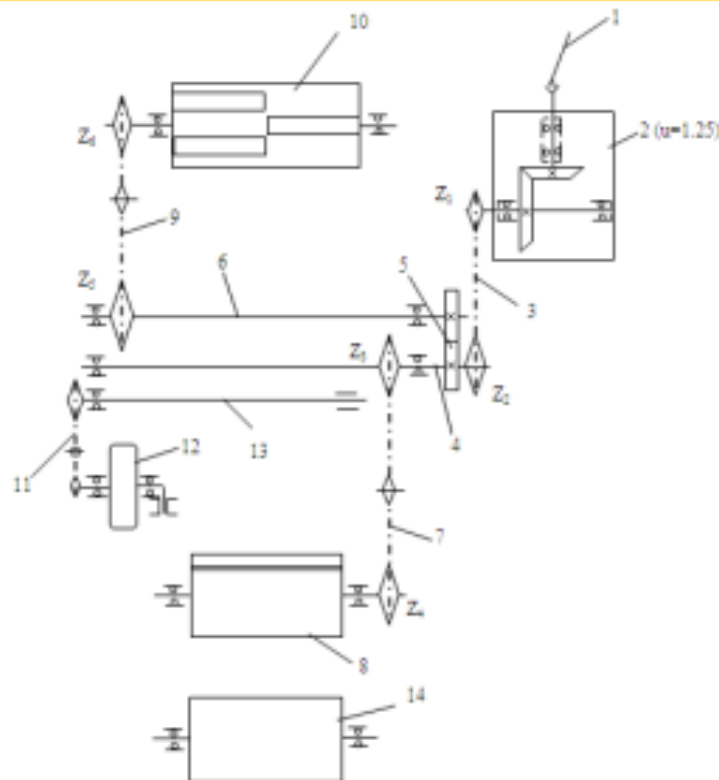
The kinematic scheme of the combined unit: 1-kardan; 2-conic reducer; 3, 7, 9, 11-chain drivers; 4, 6-shaft; 5-cylindrical gear wheel; 8-winging drum; 10-milling drum; 12-basic wheel; 13-shaft of the bobbin sowing device; 14-skating rink
